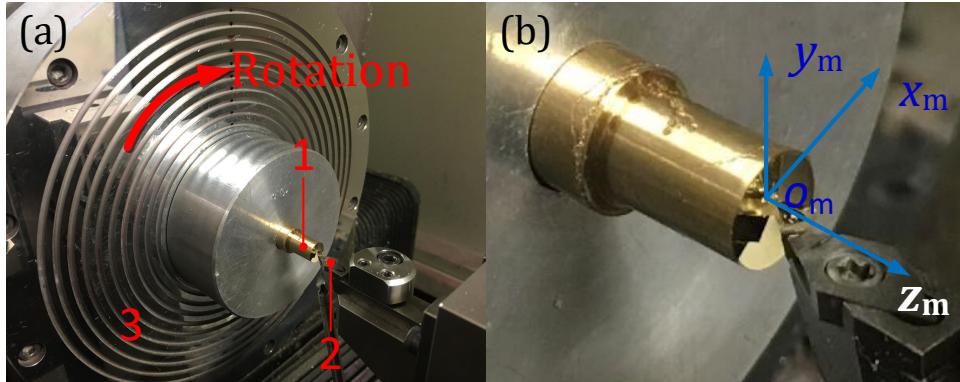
Hardware configuration of the practical cutting system, (a) the global view, and (b) the enlarged view of the interaction between the diamond tool and the workpiece, where 1. the workpiece, 2. the diamond tool, 3. the spindle.
